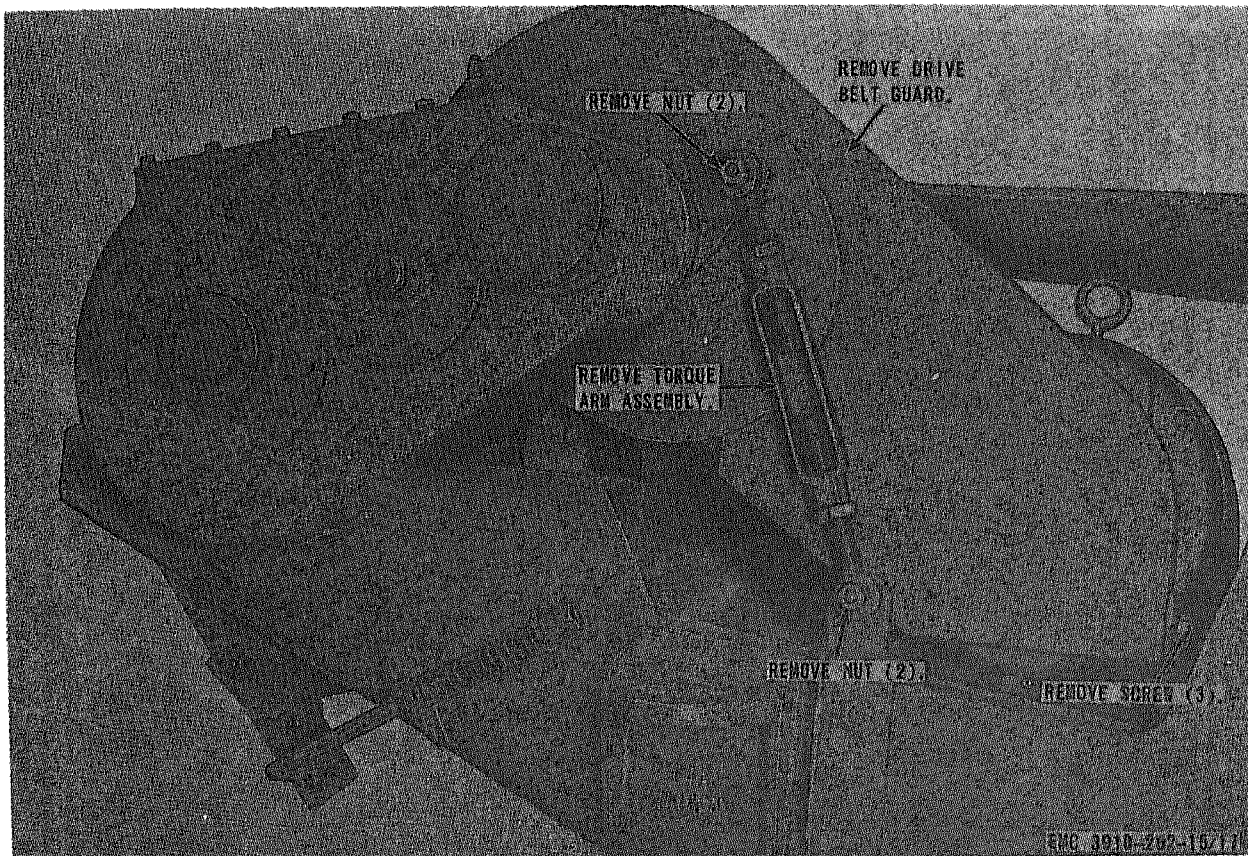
Torque arm assembly and drive belt guard removal and installation.
